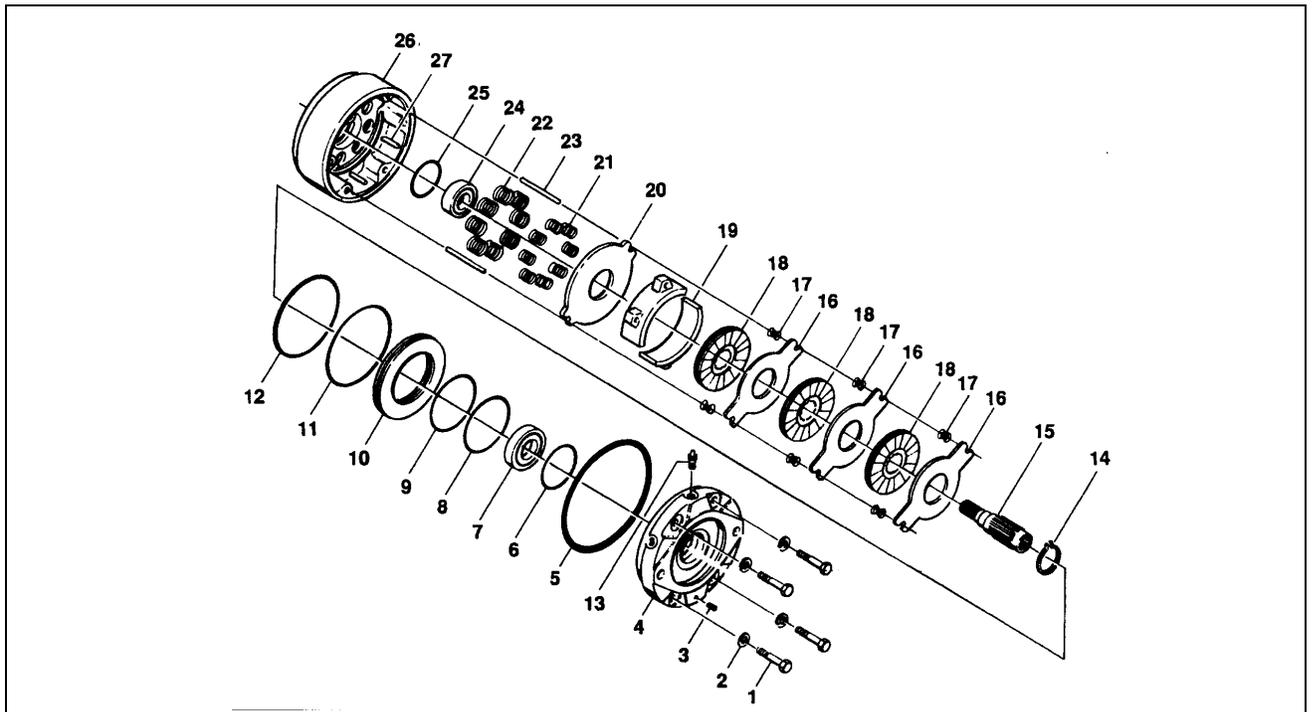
Swing Brake Assembly - Mico (Machines Built Prior To May 1992).
